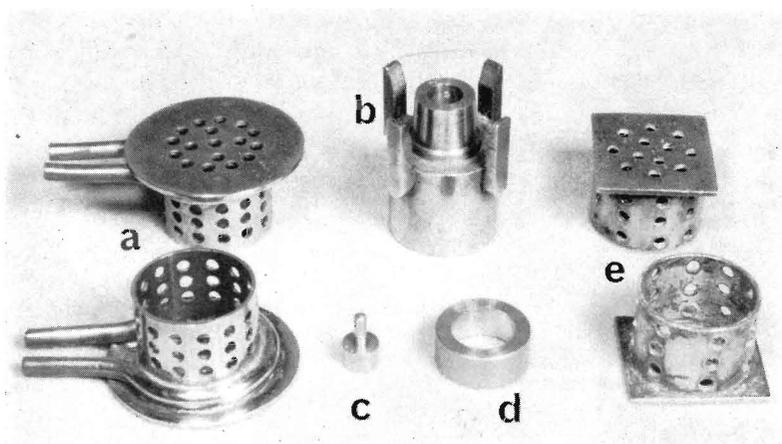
The inside and outside dimensions comparative measuring apparatus used for measuring the dimensional changes of stone models: a=top and reverse views of a water cooling tray, b=the original model, c=the fitting insert, d=the fitting ring, and e=top and reverse views of a tray without water coolant.
